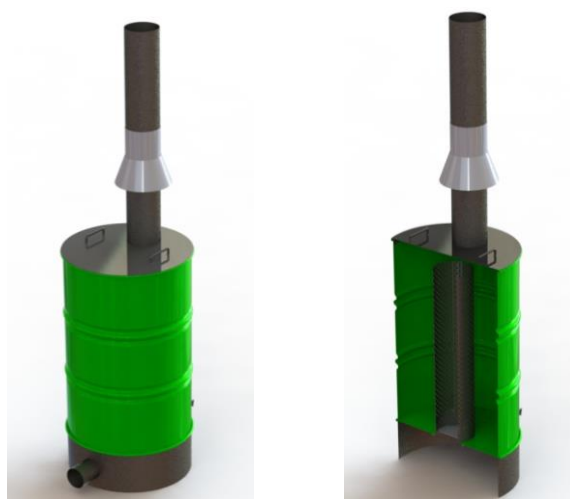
TLUD-reactor core elements, left: General view with closed lid, right: cutaway view through barrel and perforated cylinder
